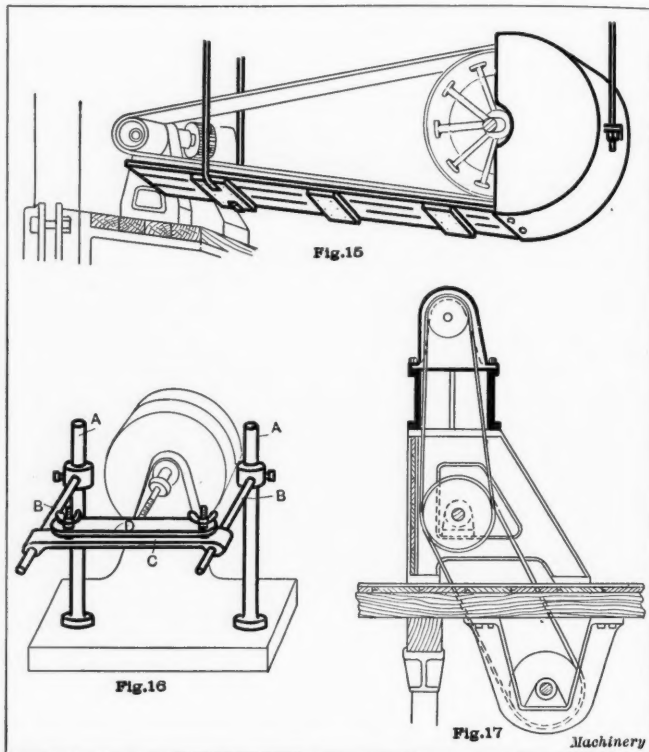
Guard for Overhead Drive with Wide Heavy Belt. Fig. 16. Holder for Preventing Rotation of Castings when Tapping. Fig. 17. Safe Method of Driving Polishing Heads from beneath
